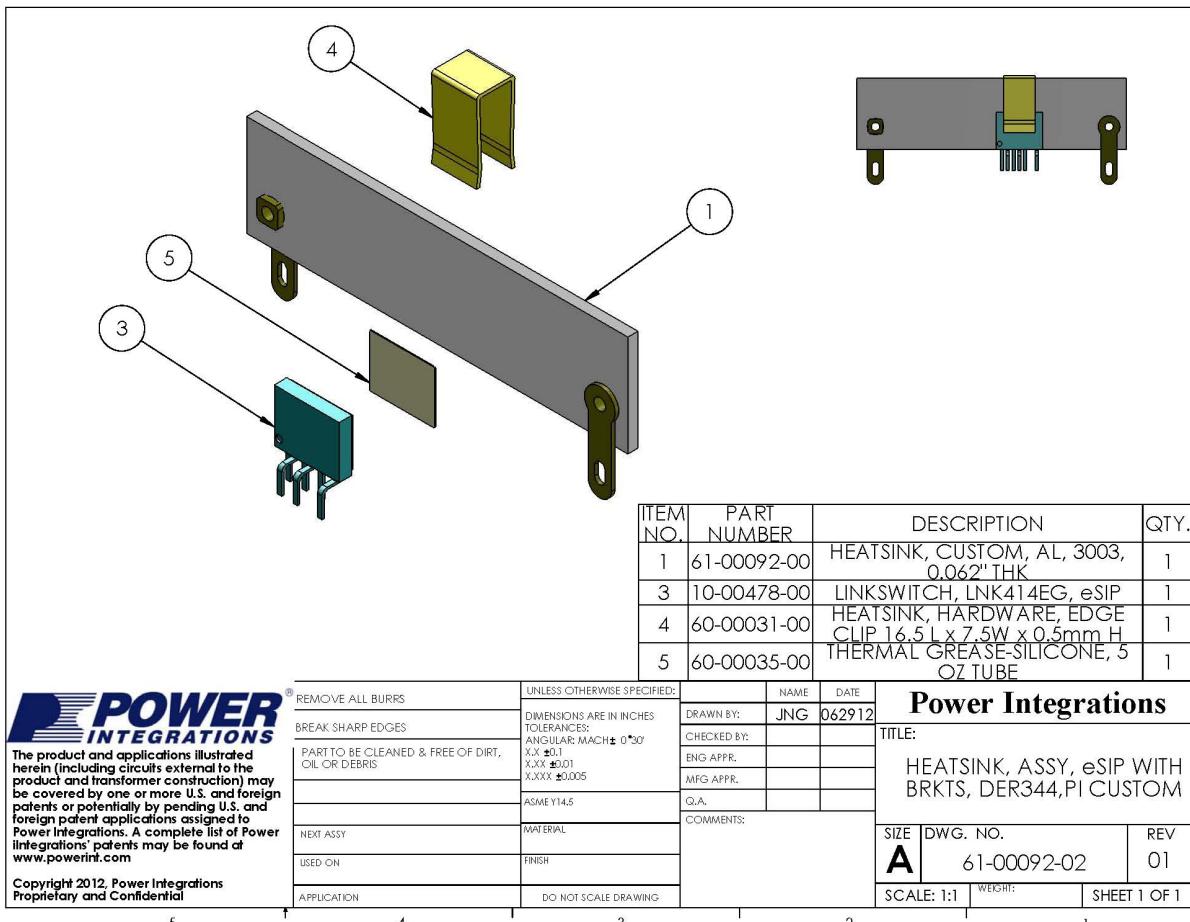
LNK414EG (U1) and Heat Sink Assembly Drawing.
